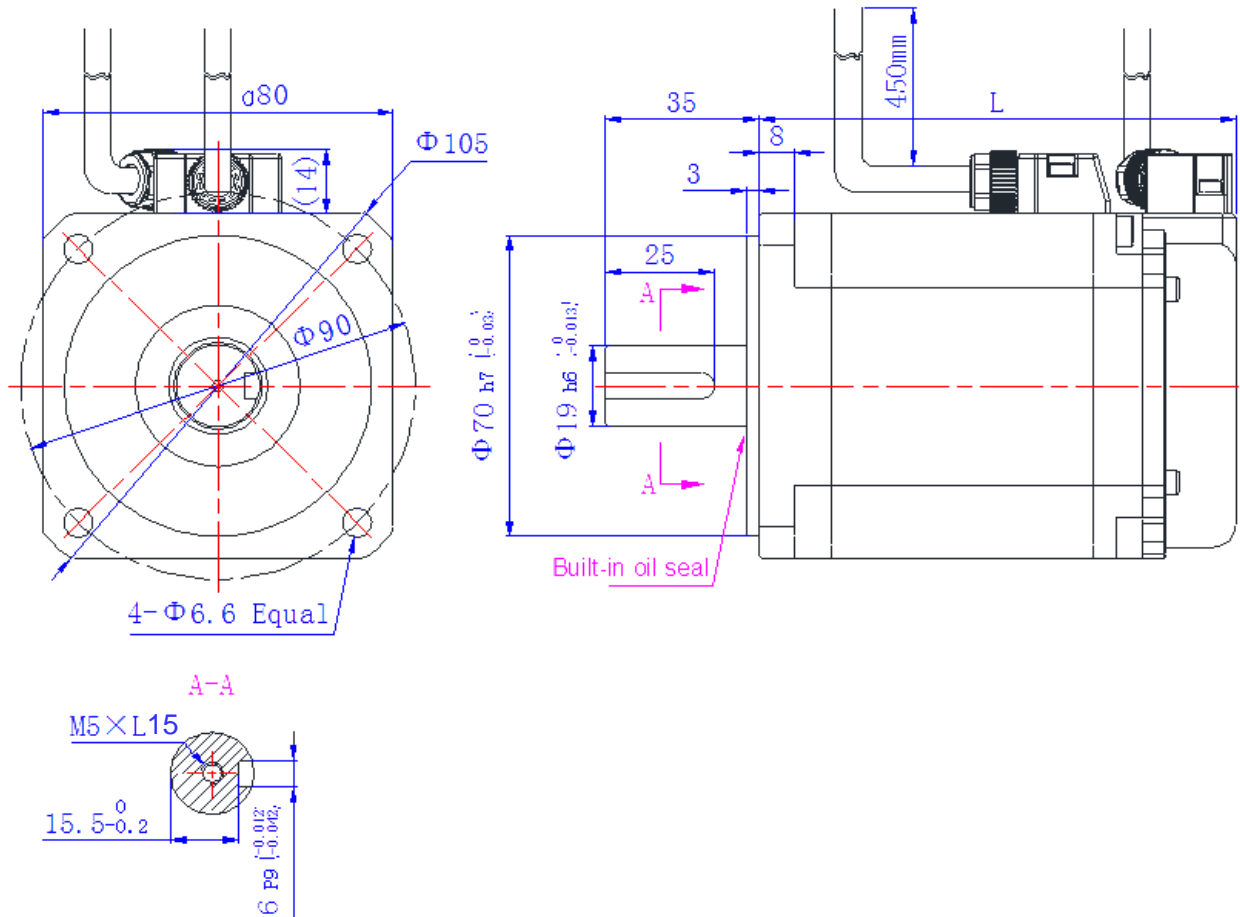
Outline dimensional drawing of ME080 series (without brake)
